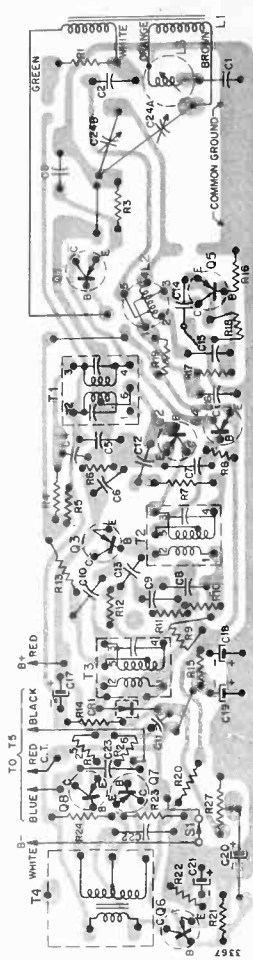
View of Printed Wiring Board. NOTE: Gray area represents printed wiring, black symbols and lines represent components and wiring on opposite side.
